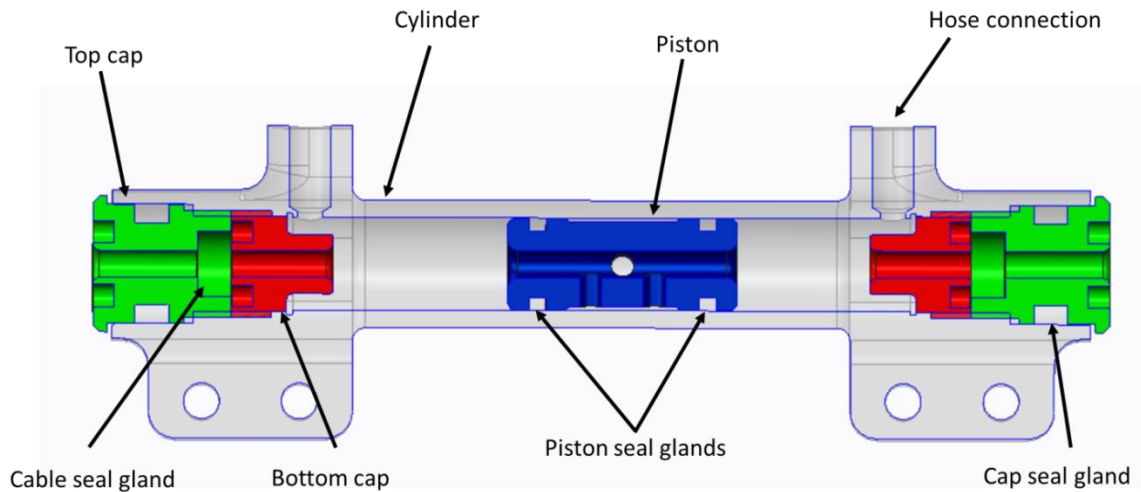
Cross-section of miniature piston cable hydraulic cylinder
